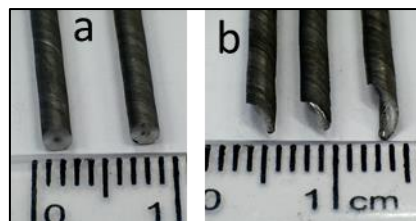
12 - a. Ductile type A torsion fracture of an as drawn wire b. Brittle Type C torsion fracture of an aged wire.
